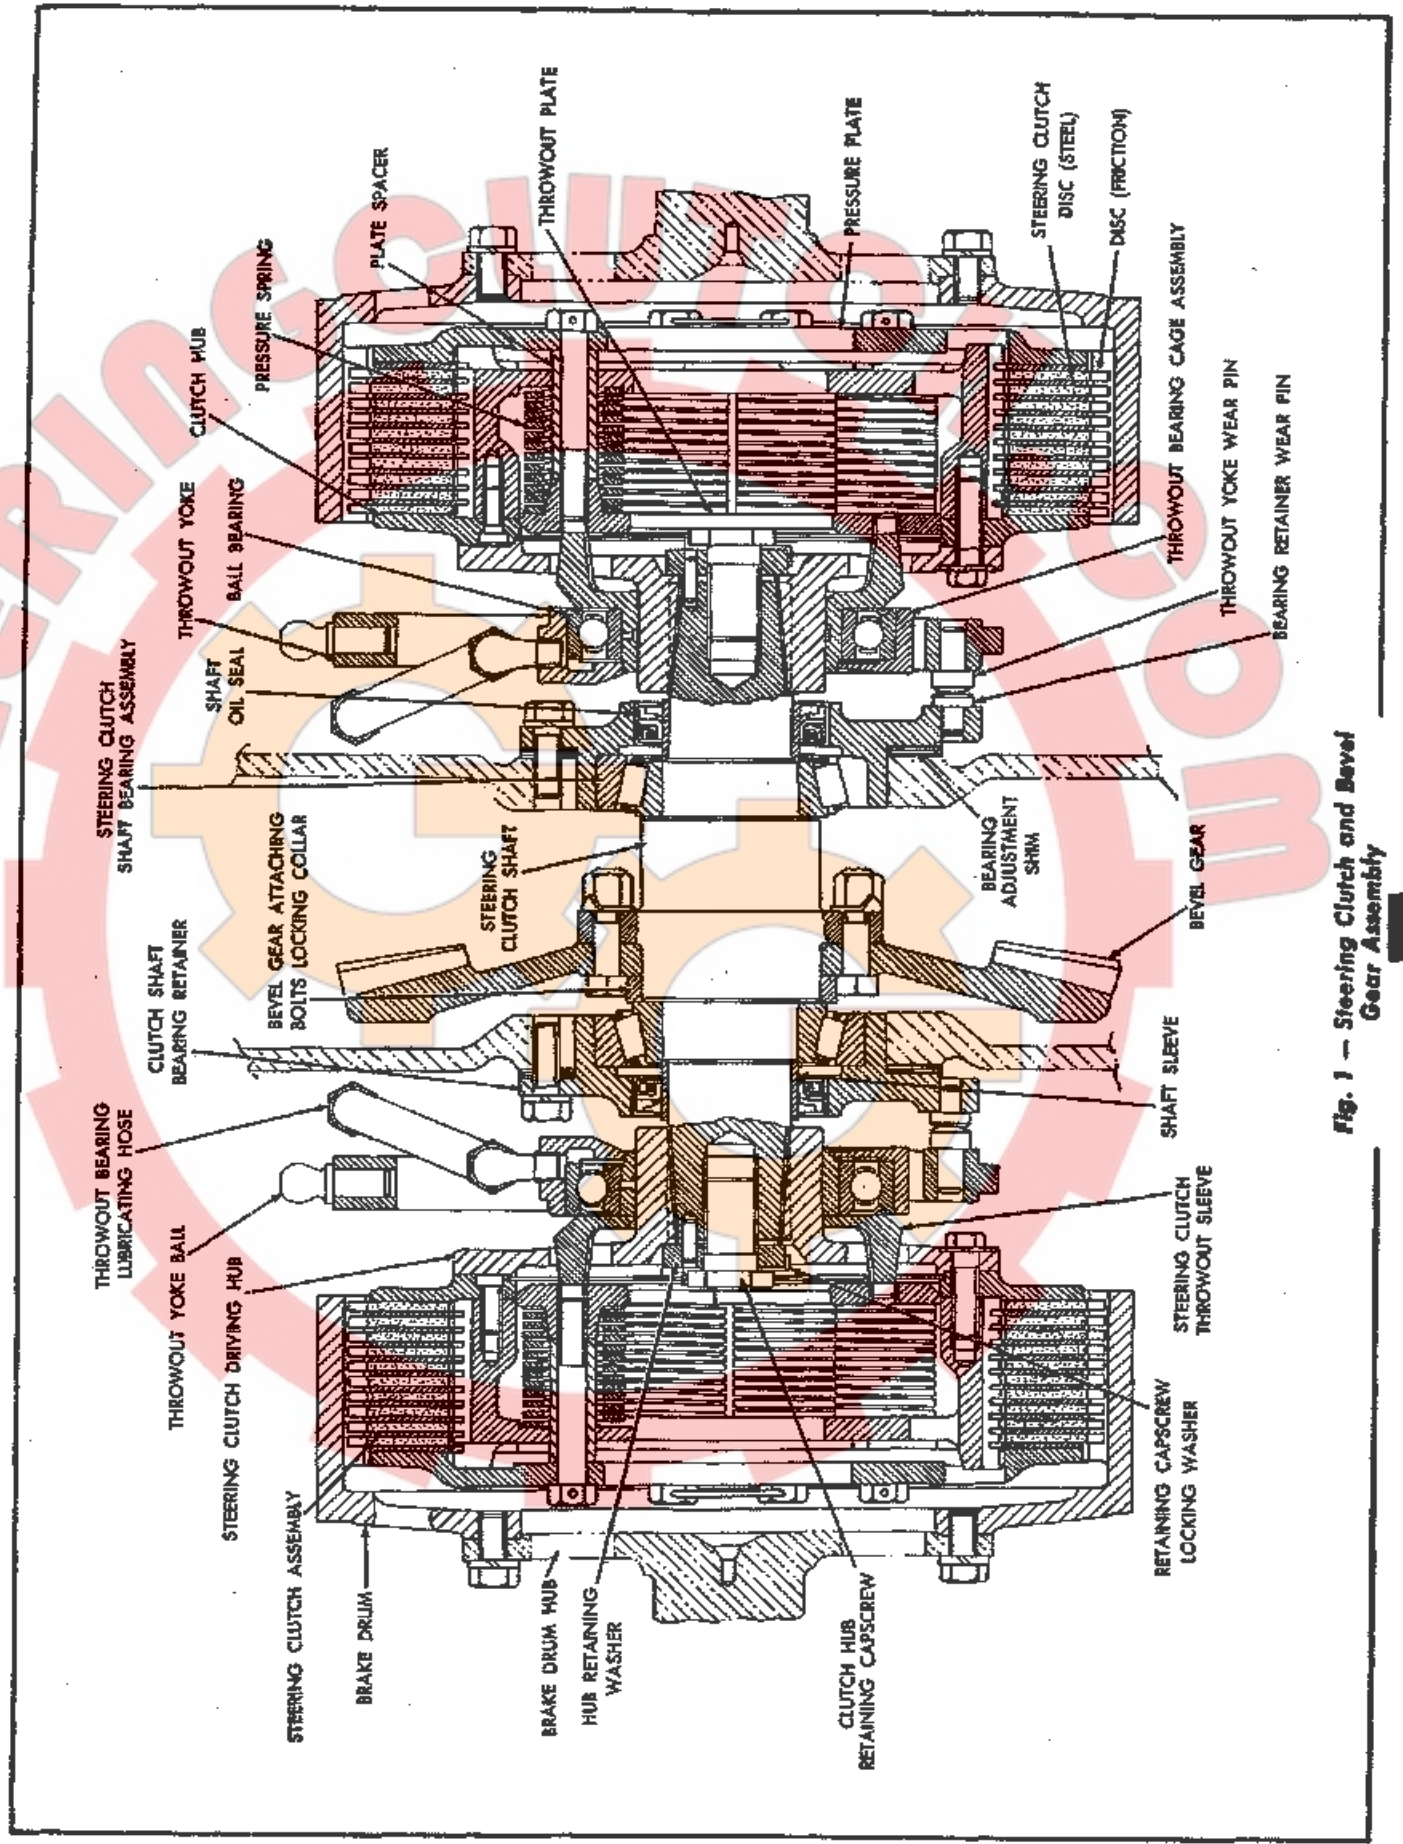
Steering Clutch and Bevel Gear Assembly
